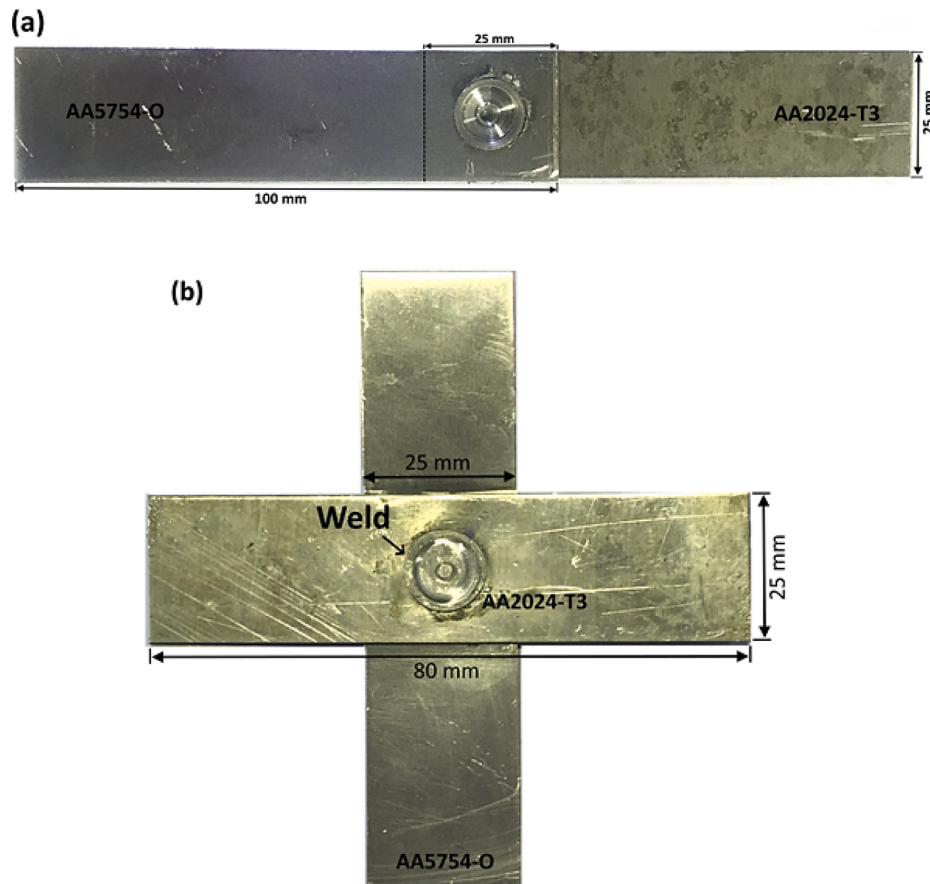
The dimension of samples, (a) Tensile-shear test, (b) Cross-tension test.
